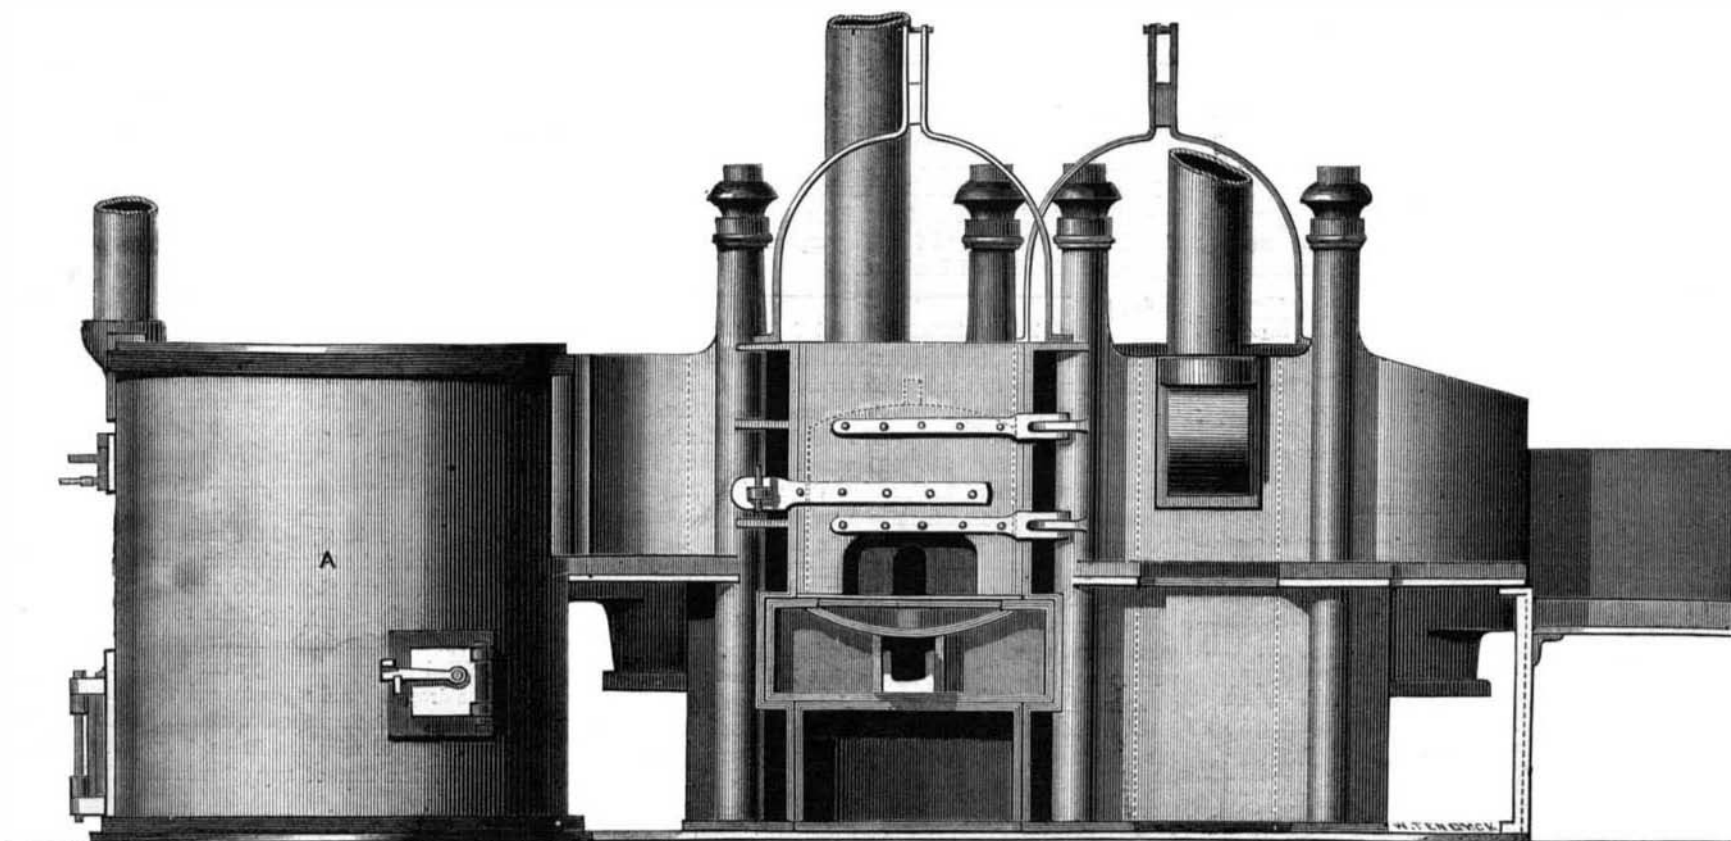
CADDICK AND MAYBERY PUDDLING FURNACE—LONGITUDINAL ELEVATION.
